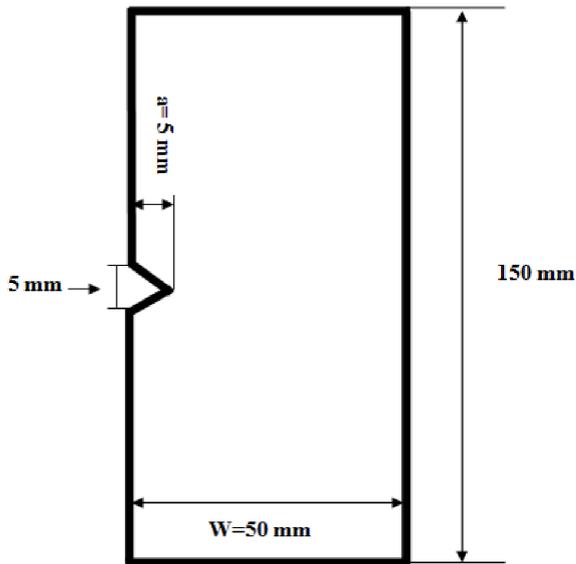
Single Edge Notch Tension (SENT) Specimen dimensions
